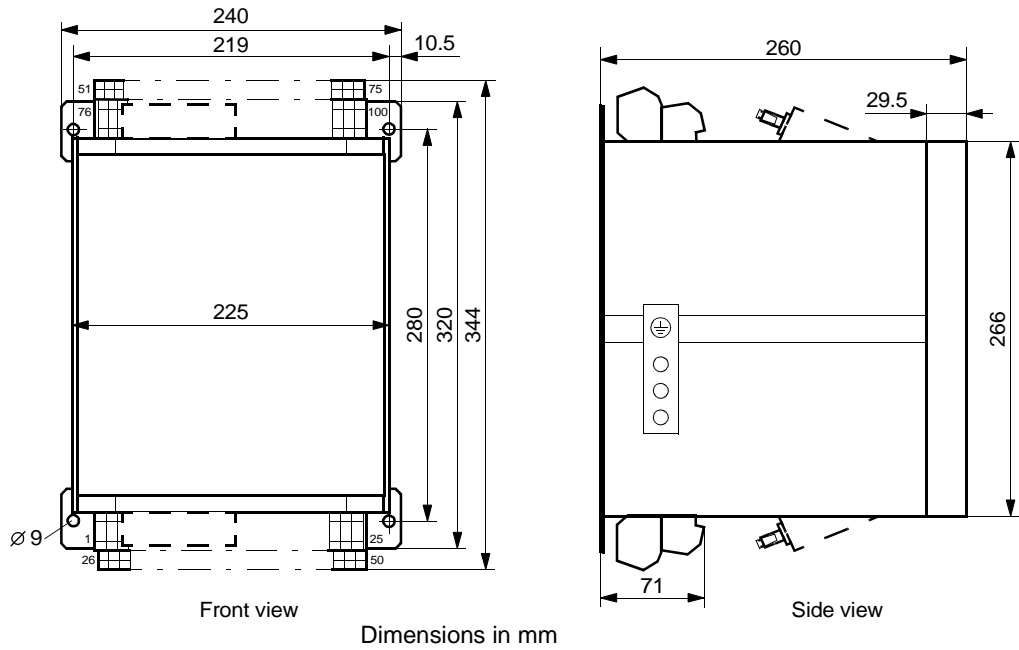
Dimensions 7UT613 for panel surface mounting (size $1/2$)
